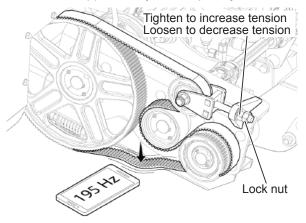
Feed Auger Drive Belt Tension Adjustment
